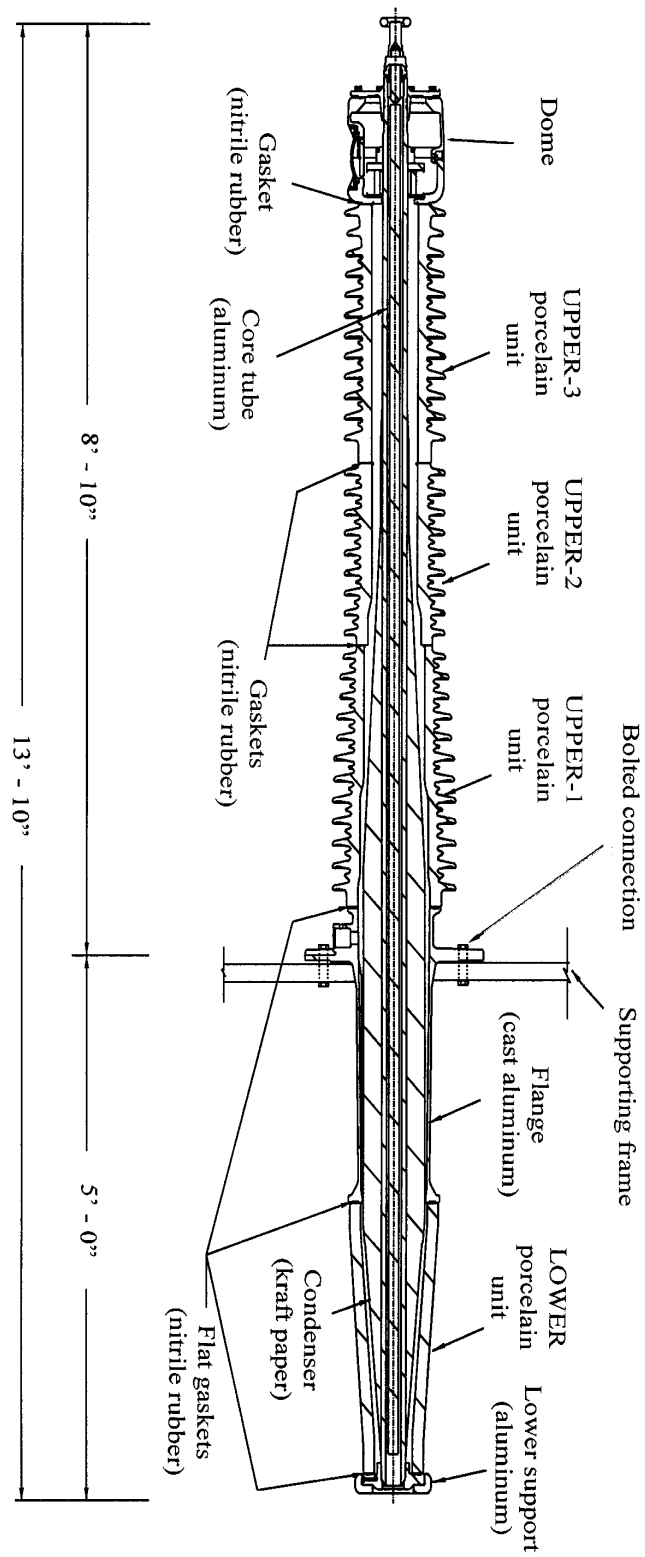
Geometry and longitudinal section of a 196 kV transformer bushing
